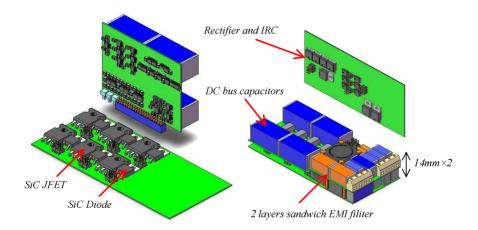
Assembly concept of the 2.2 kW SMT multi-layer PCB industrial drive [Jos11b]
